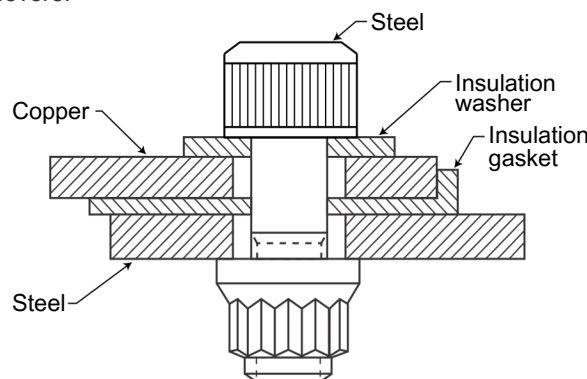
A method of electrically insulating a bolted joint to prevent galvanic corrosion.
